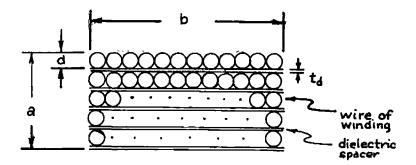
Cross-section of a winding showing dimensioning.
